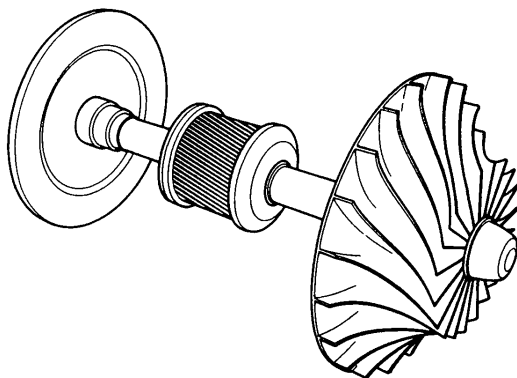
Pinion of an integral-gear unit having open, backward-curve-bladed impellers.
